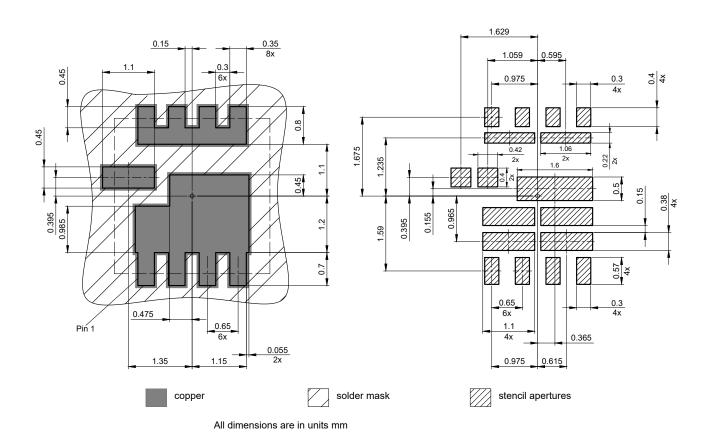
Outline Footprint (PG-WHTFN-9-1), dimensions in mm
